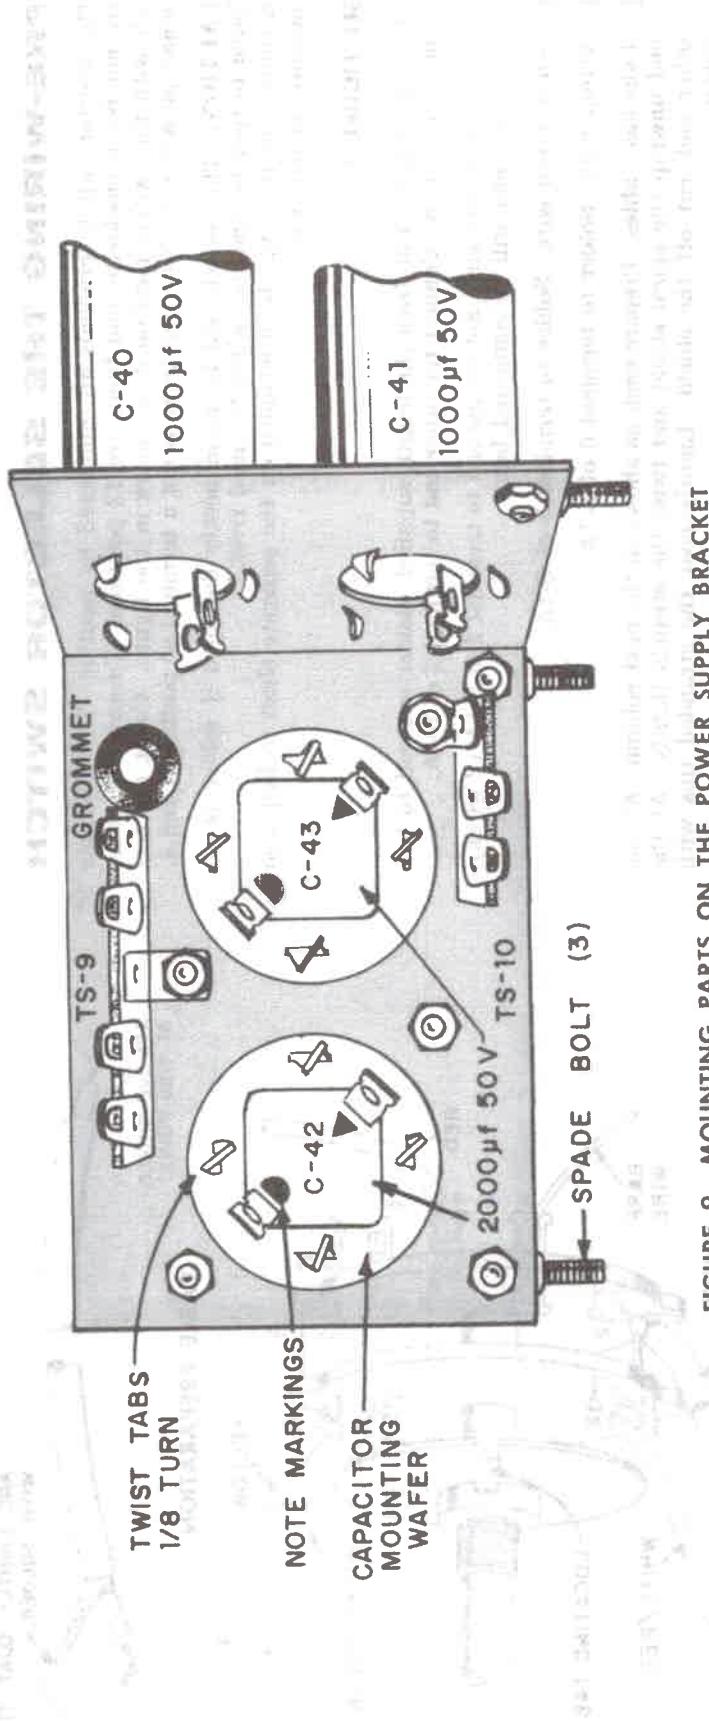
MOUNTING PARTS ON THE POWER SUPPLY BRACKET
